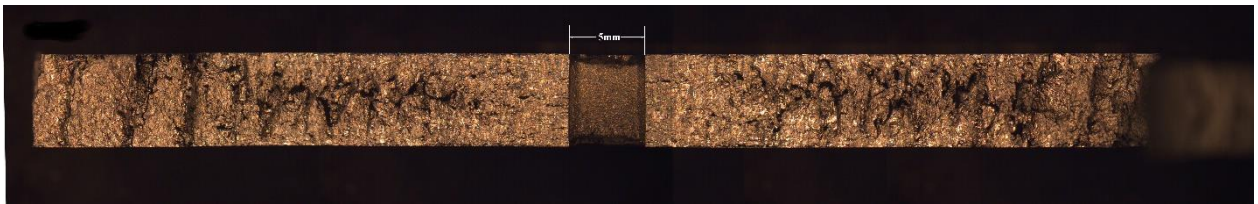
Morphology of the fracture surface of the 7050-T7651 middle tension specimen.
